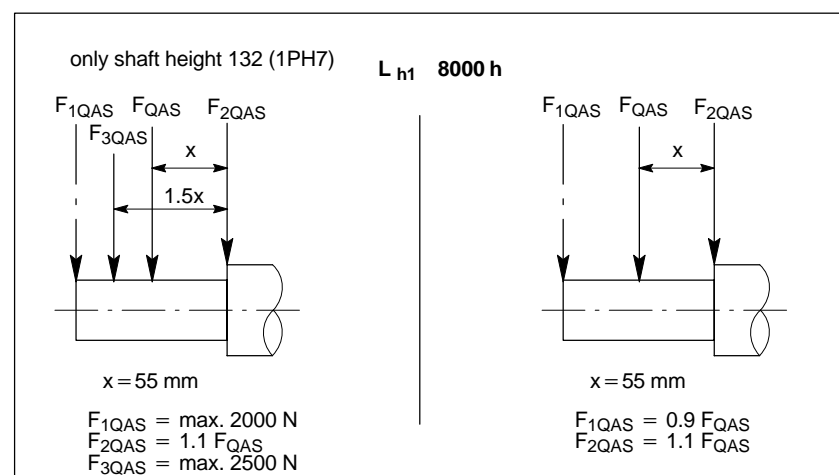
Point of application of cantilever forces at the motor shaft end
